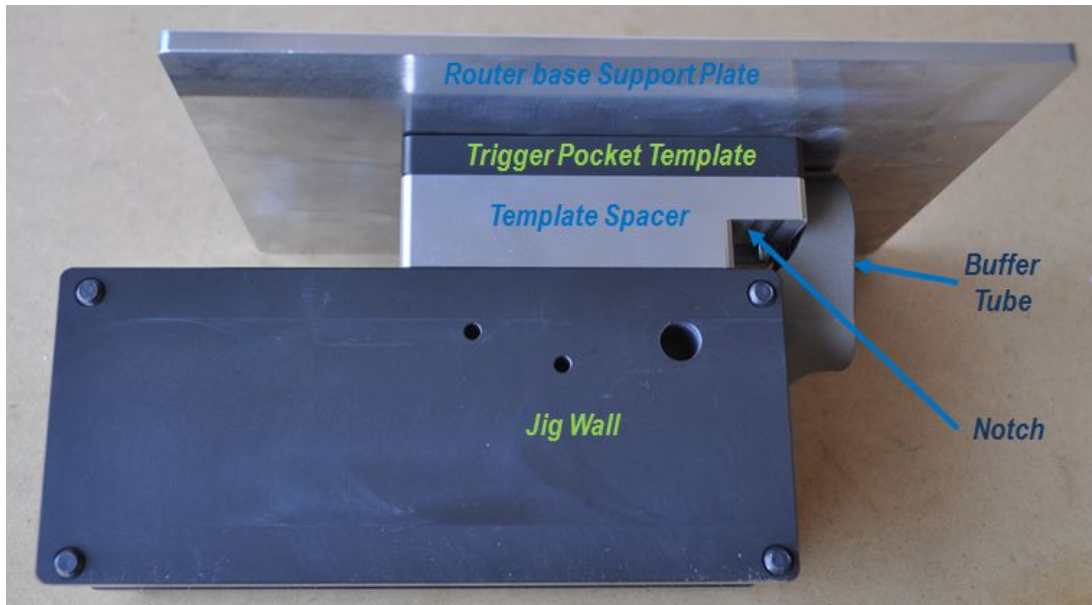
"EZ jig" for trigger pocket milling showing the stack-up.
